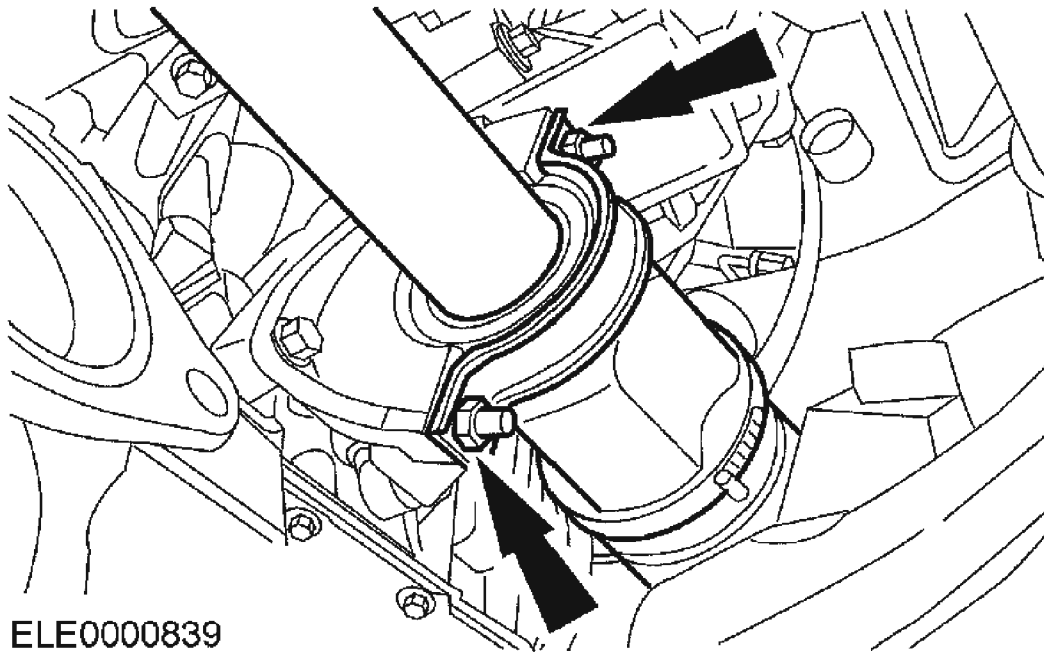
Removing Mounting Bracket Nuts Then Bracket From Halfshaft Intermediate Bearing
